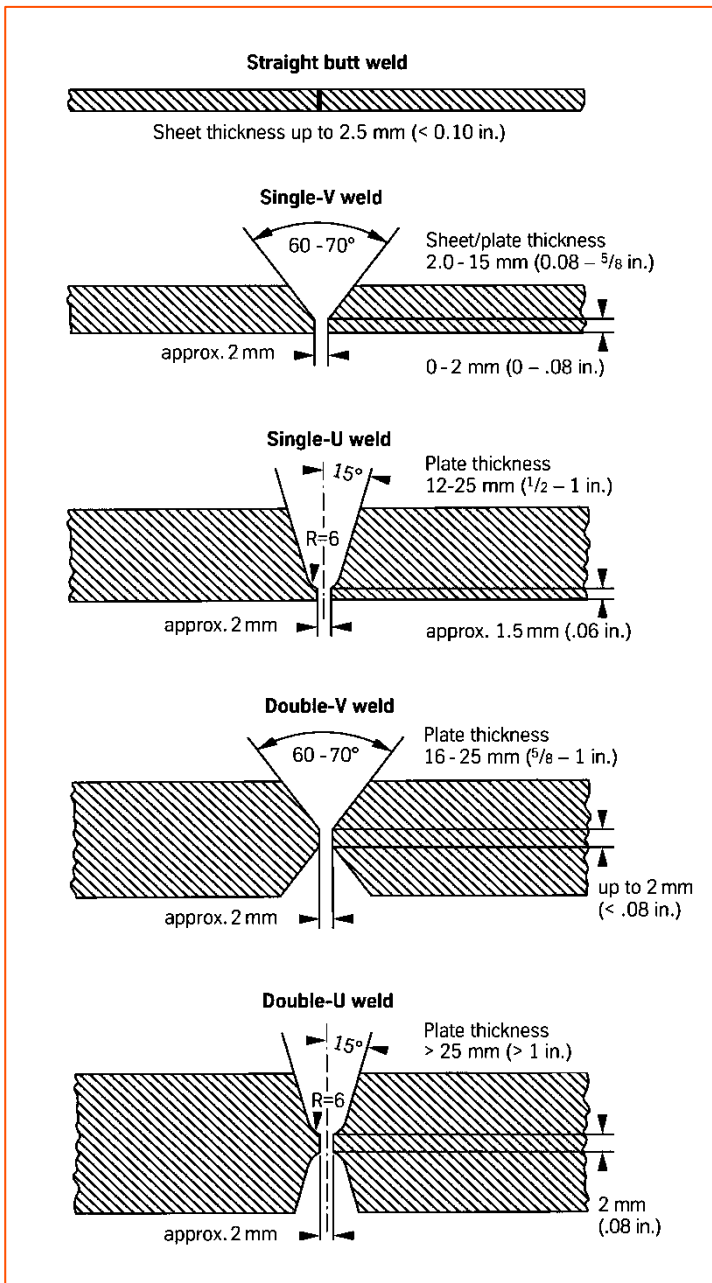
Seam preparation for welding nickel alloys and special stainless steels
